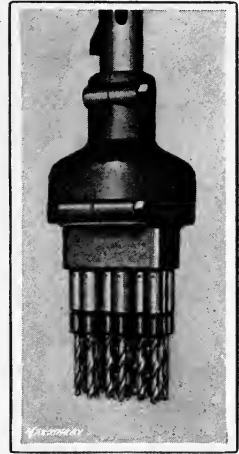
Eighteen-spindle Auxiliary Drill Head
